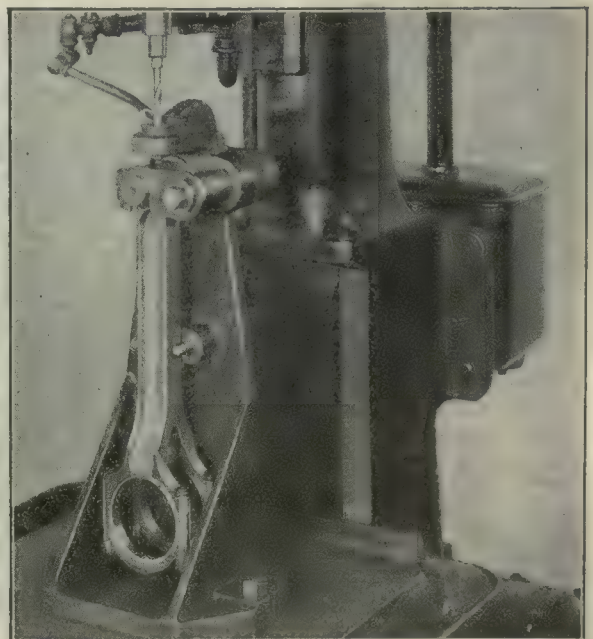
DRILL OIL HOLE PISTON-PIN END
